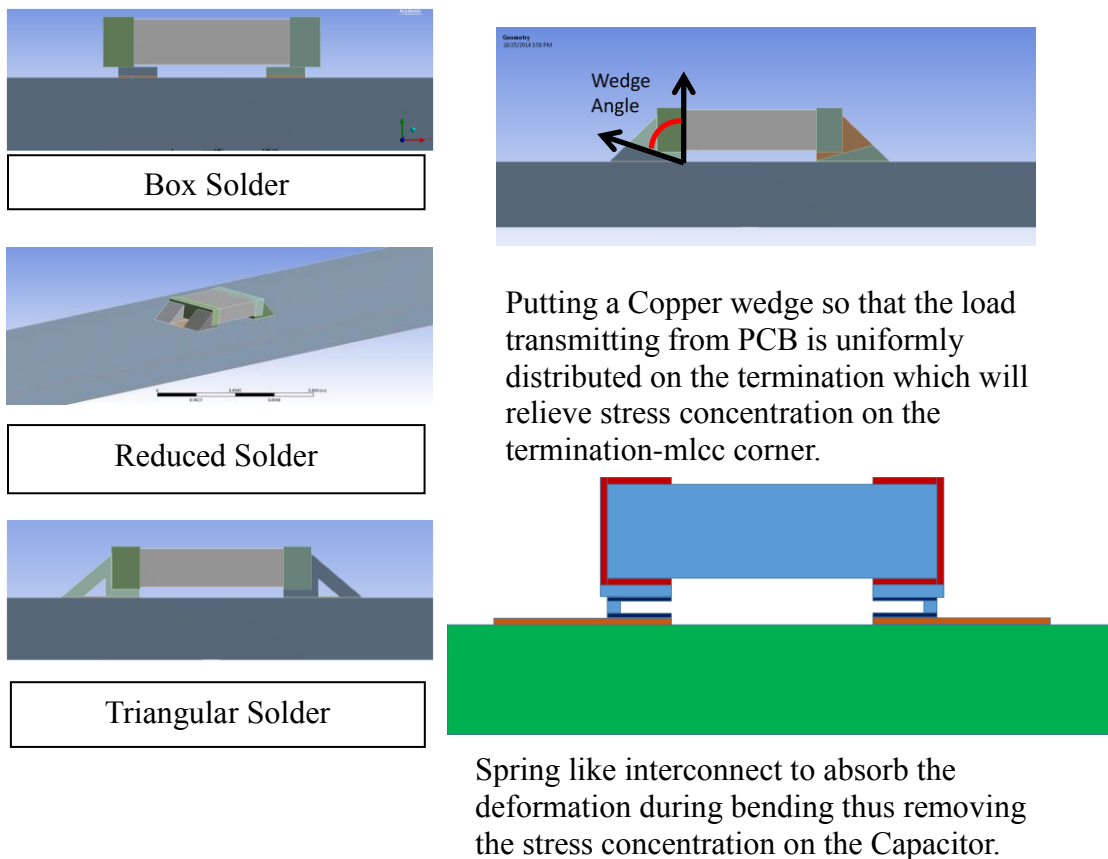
Exploring Innovative techniques for surface mounting MLCC on PCB
